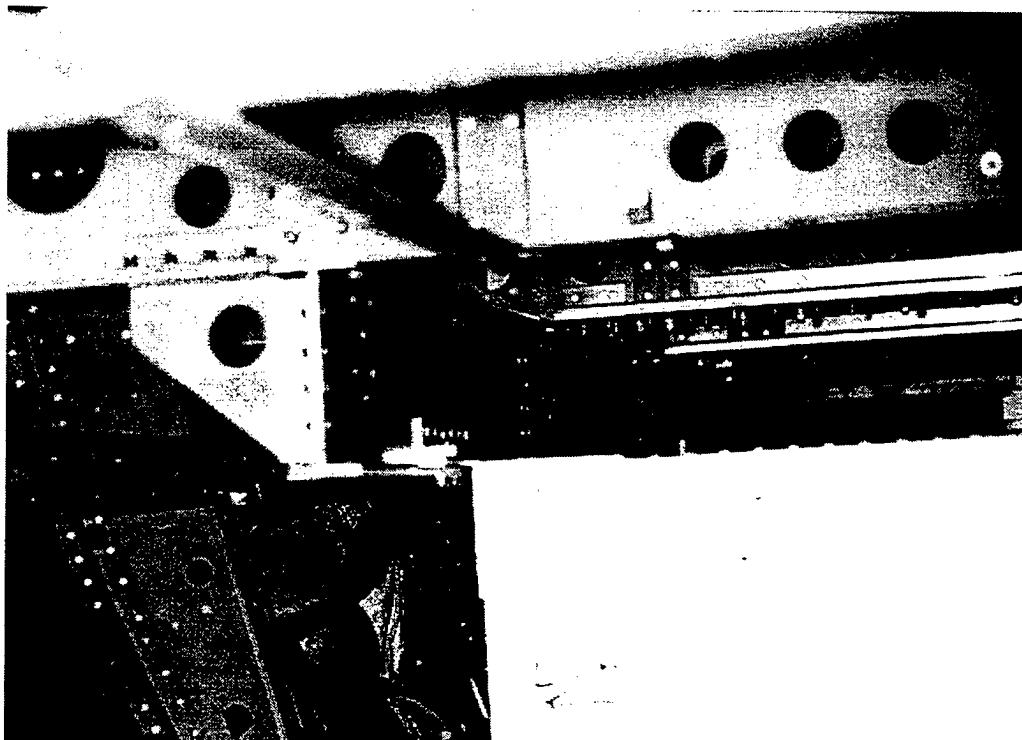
PRETEST AUXILIARY FUEL TANK LEFT ATTACHMENT FRAMEWORK
